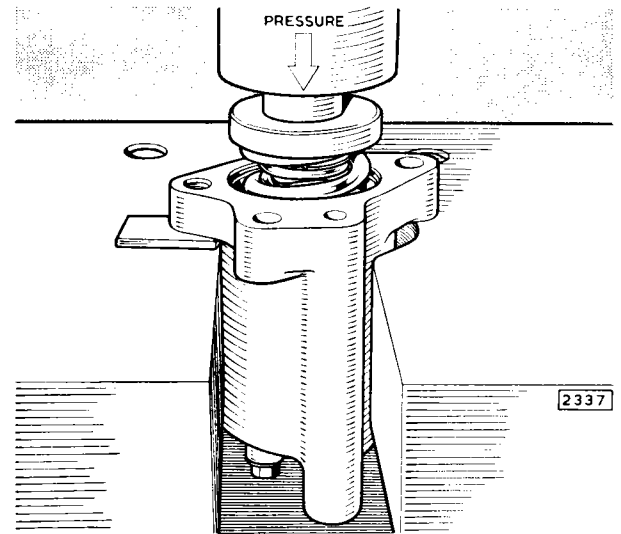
Assembling the dashpot piston with the aid of an hydraulic press. Note the packing piece under the left-hand stud hole
